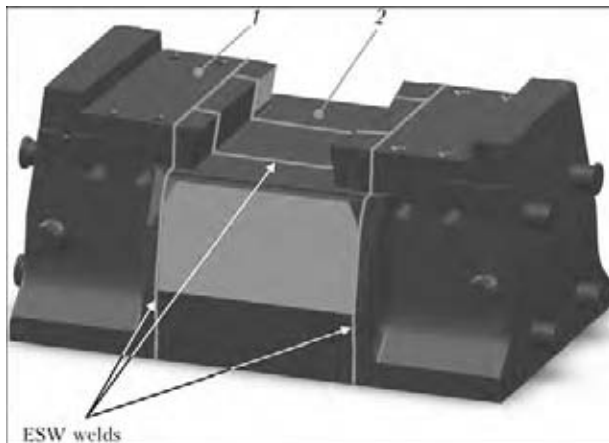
Location of ESW welds in manufacture of the anvil block: 1 – cast parts (steel 30L); 2 – forged-welded middle part of the anvil block consisting of three forged pieces from steel ITs-1A
